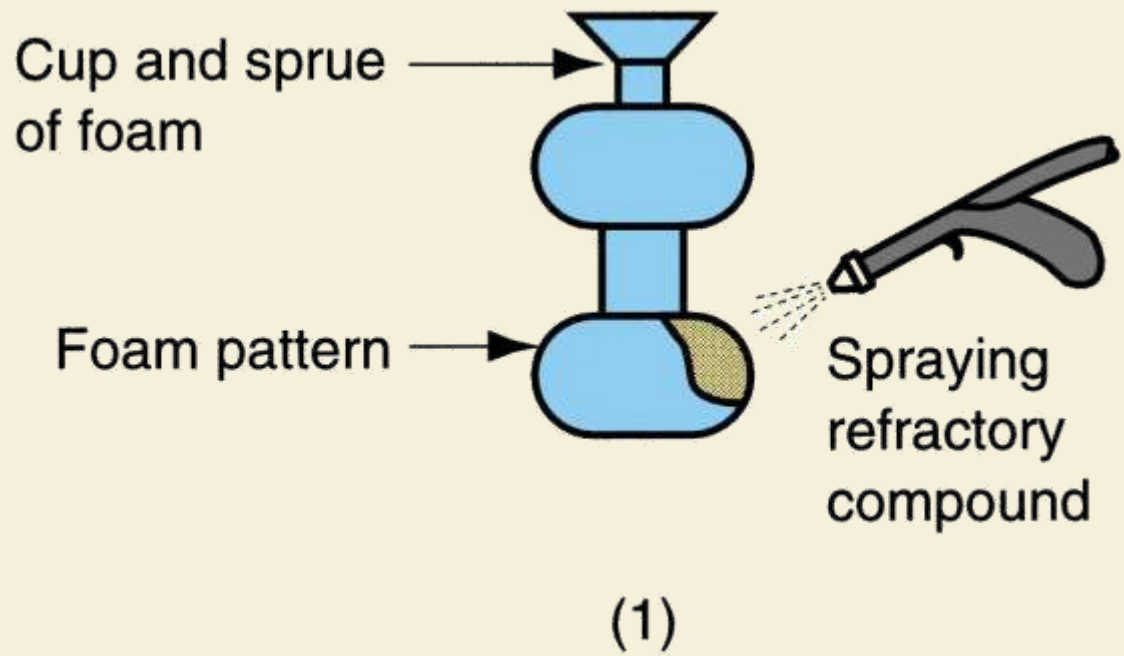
Expanded polystyrene casting process: (1) pattern of polystyrene is coated with refractory compound;
